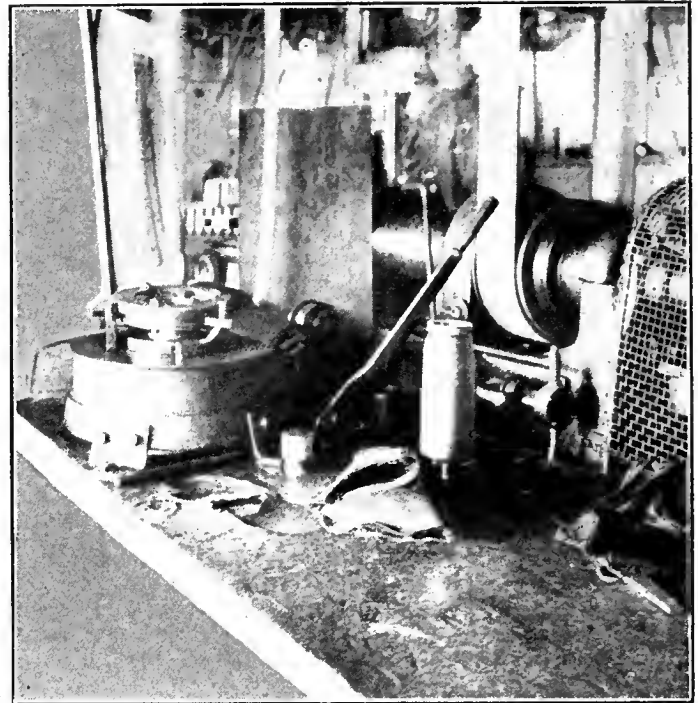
SCREWING IN SOCKETS WITH SPECIAL DEVICE
